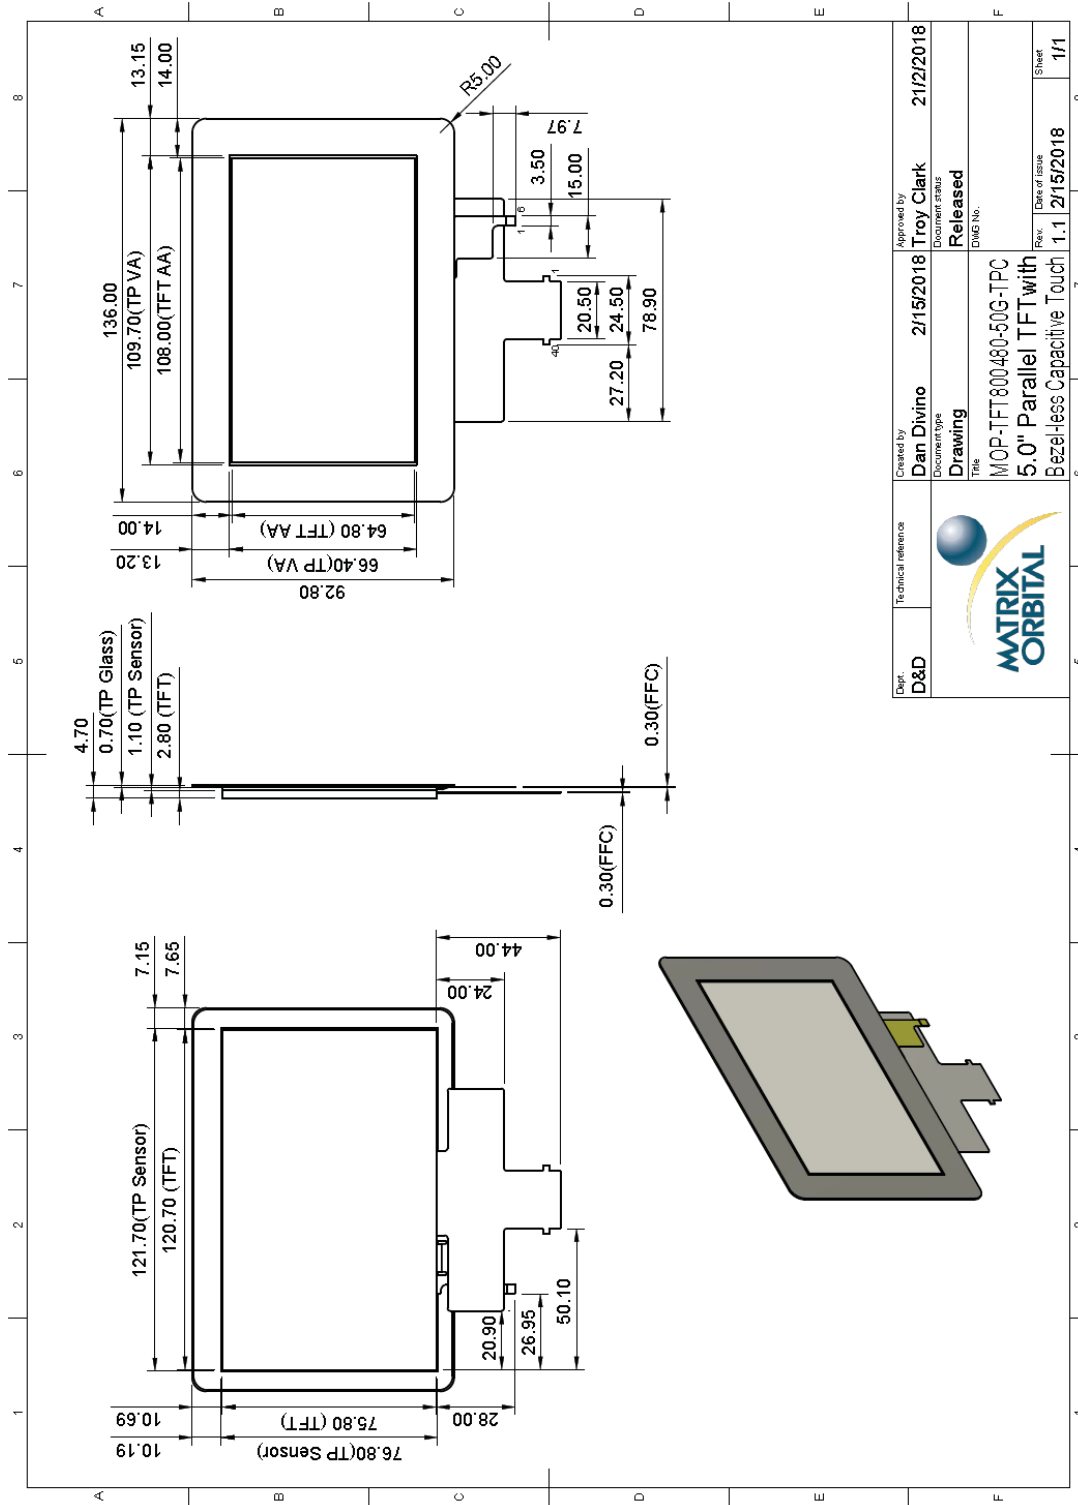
MOP-TFT800480-50G-BLM-TPC Drawing
